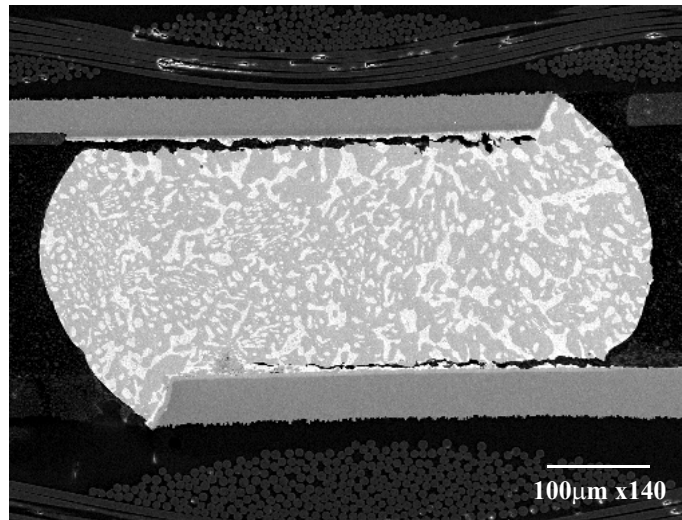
Typical Solder Joint Fatigue Failure, 15 mm BGA, Vendor V1
